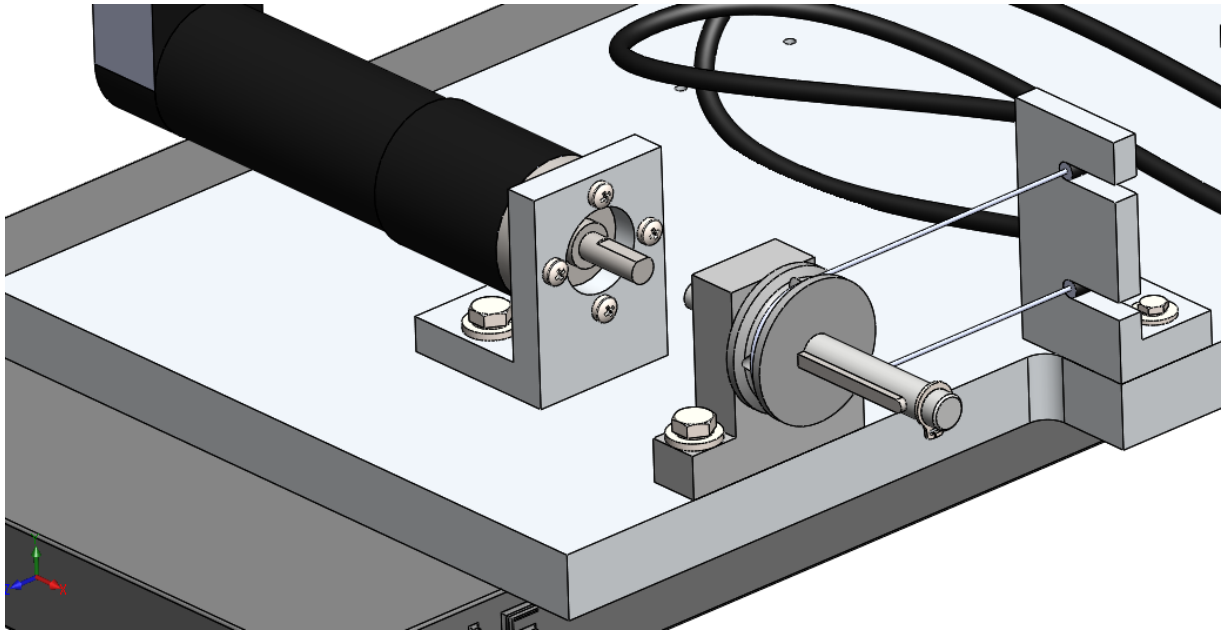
Assembly of the flange with the slave motor and the base. Modified from [4].
